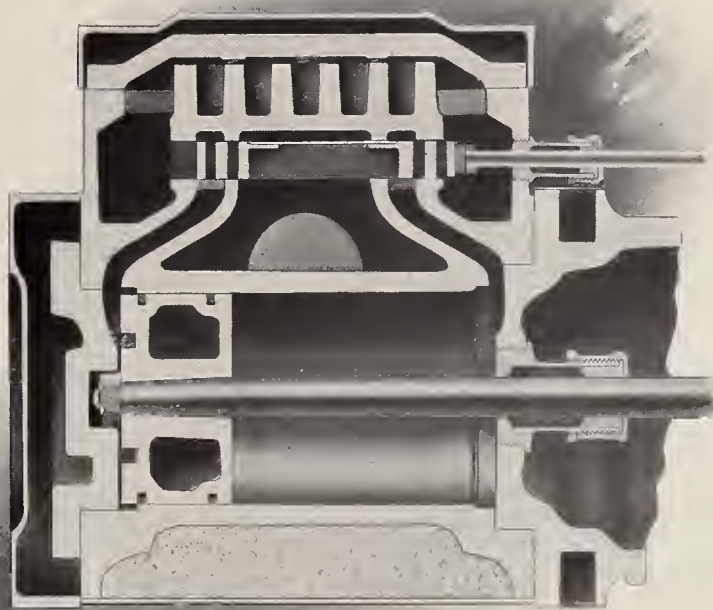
LONGITUDINAL SECTION OF CYLINDER AND VALVE CHEST OF THE CHANDLER & TAYLOR ENGINE
